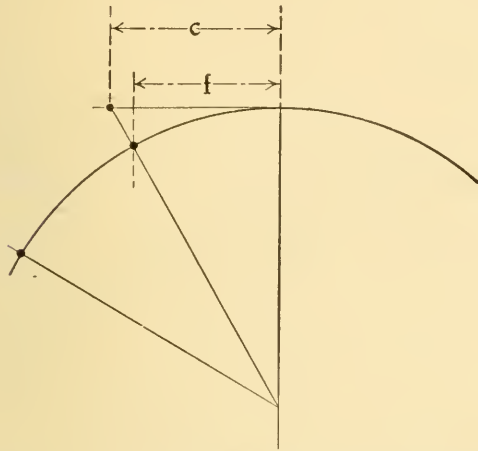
DIAGRAM SHOWING ERROR IN SETTING OVER CUTTER FOR SIDE CUT ON MILLED BEVEL GEARS.
